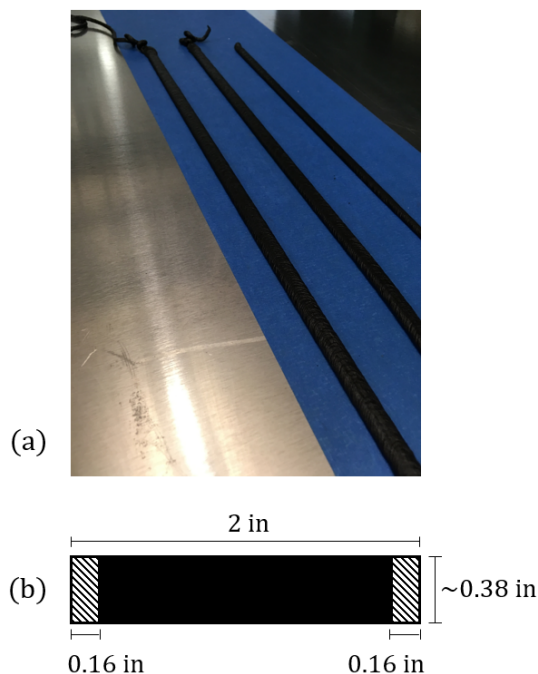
(a) Individual beads printed with Baylor's LAAM system. (b) Dimensions of the 3D printed specimen to be burn-off tested.
